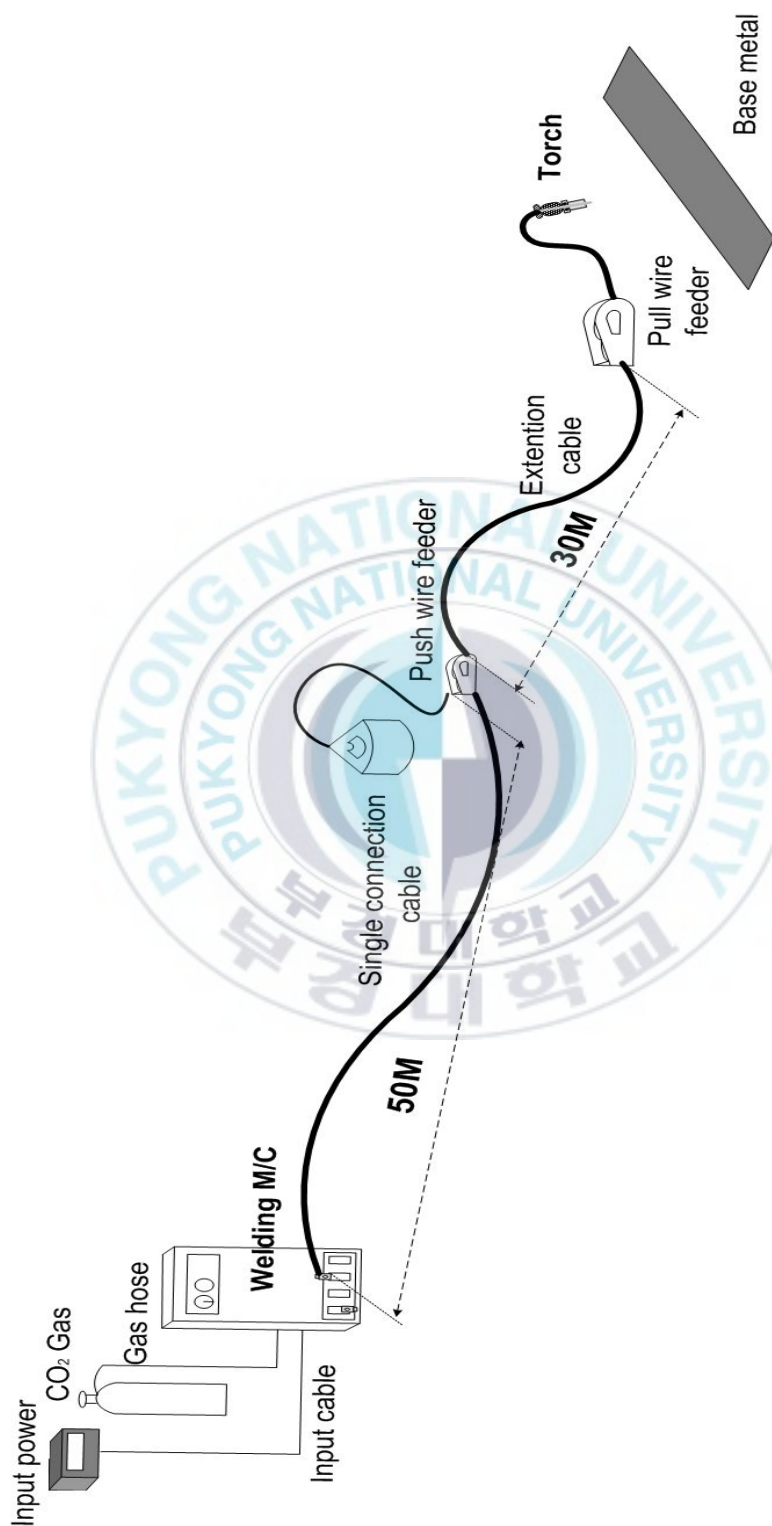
Schematic of CO₂ welding equipment with welding single connection cable and extension cable.
